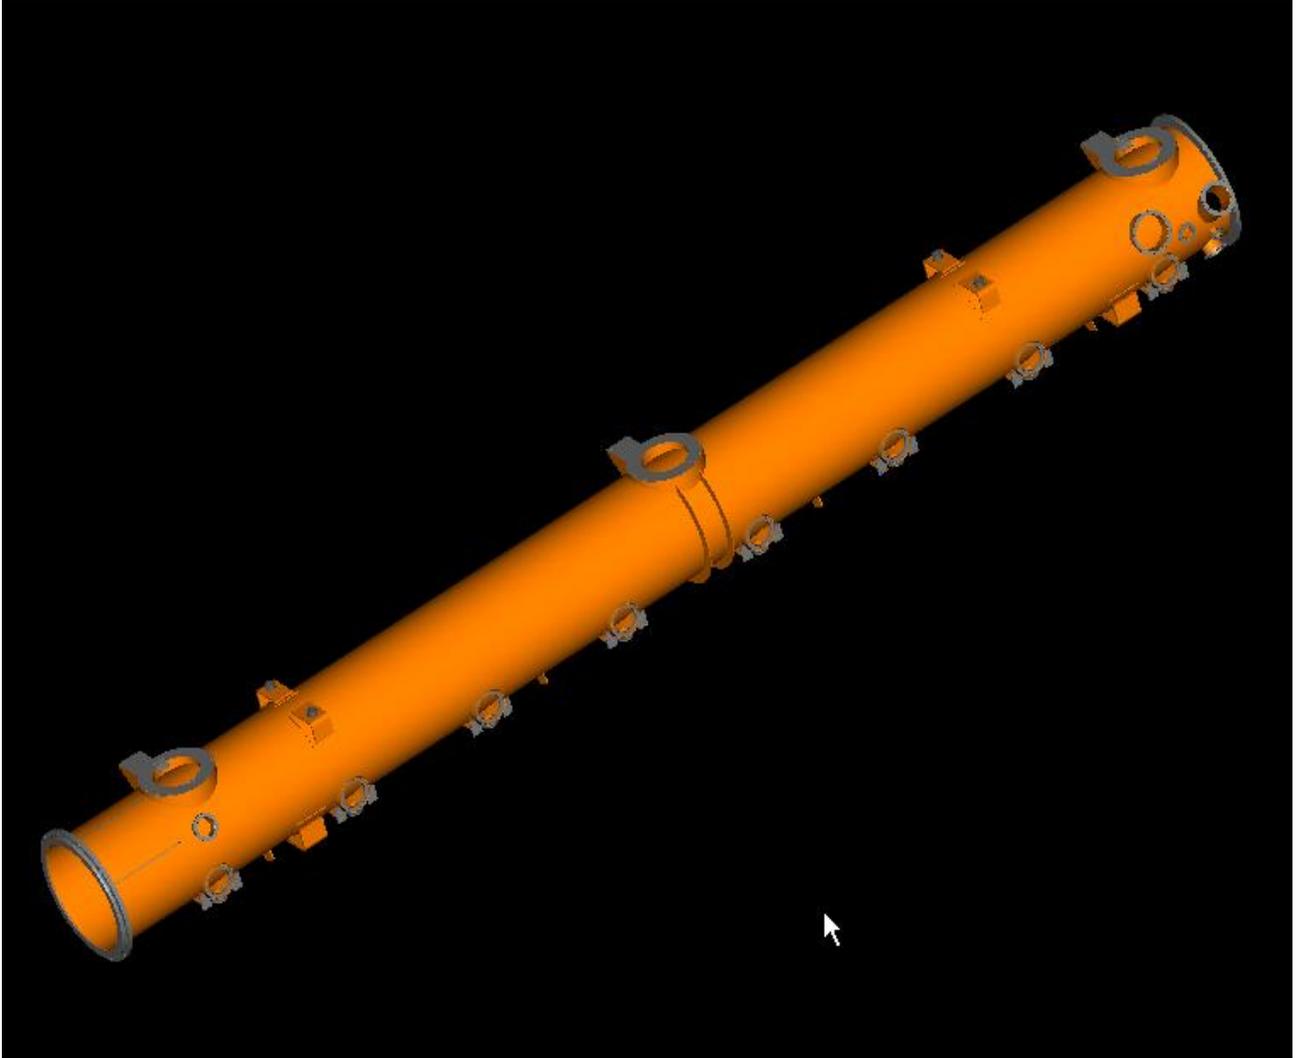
, An overall view of the vacuum vessel weldment of 1.3 MHz,
